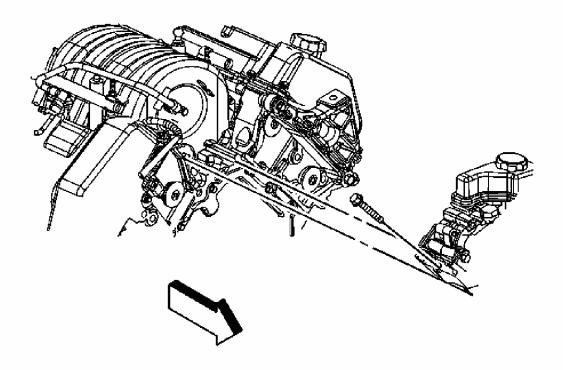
View Of Power Steering Pump Courtesy of GENERAL MOTORS CORP.
